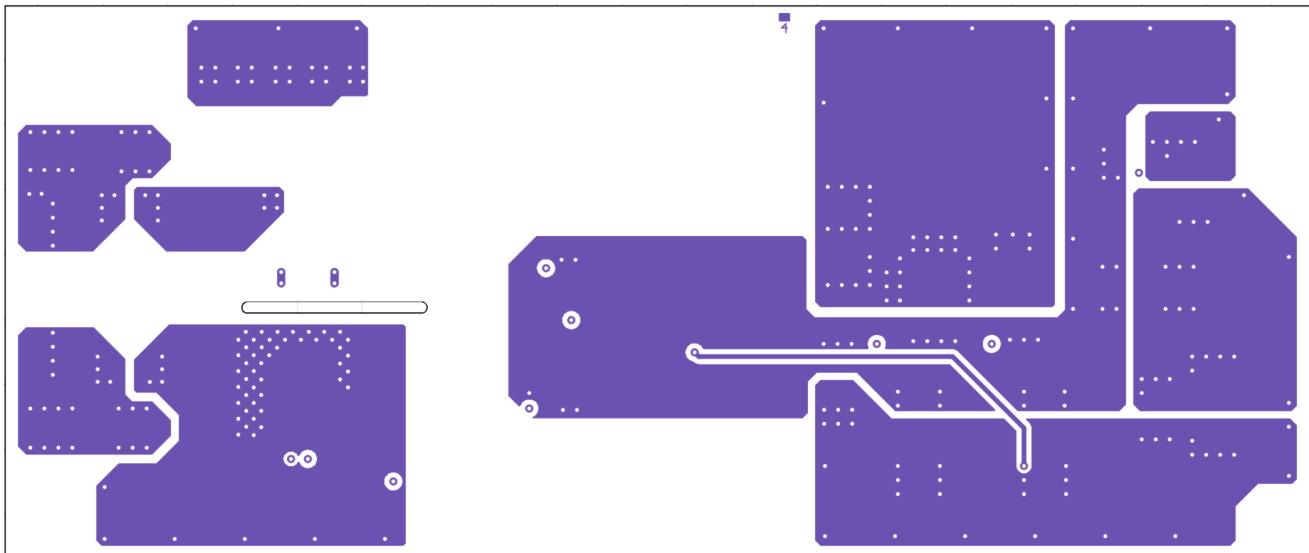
RDR-994Q Mid-Layer 4 PCB Layout.
